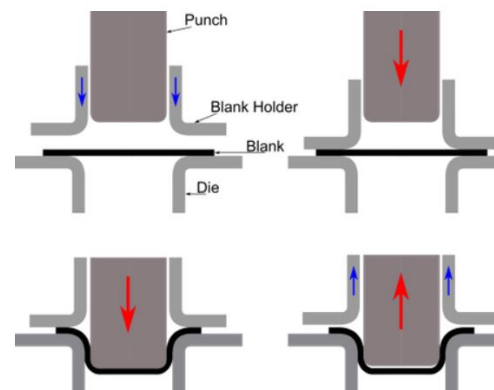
Deep drawing fuselage stringer manufacturing³.
